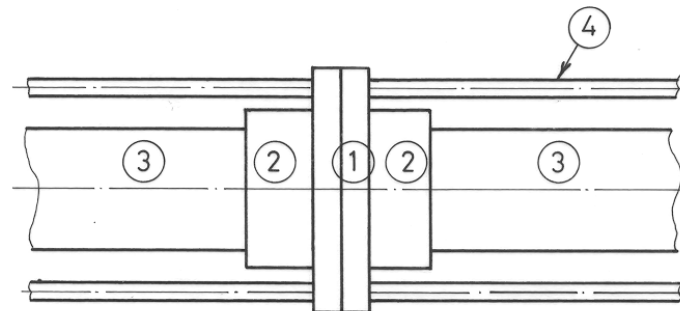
The bonding zone between two drill pipes, with four elements having distinct geometrical characteristics: 1 – flange disc; 2 – flange neck and collar; 3 – drill pipe body; 4 – air tube.
